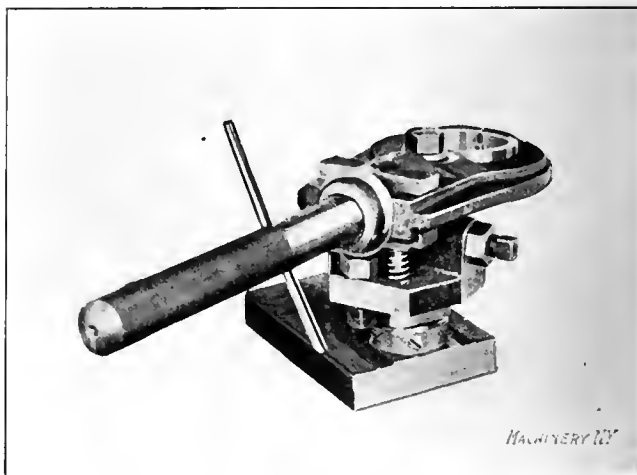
A Special Fixture for Cutting Oil Grooves in the Equalizing Gear Bushing
